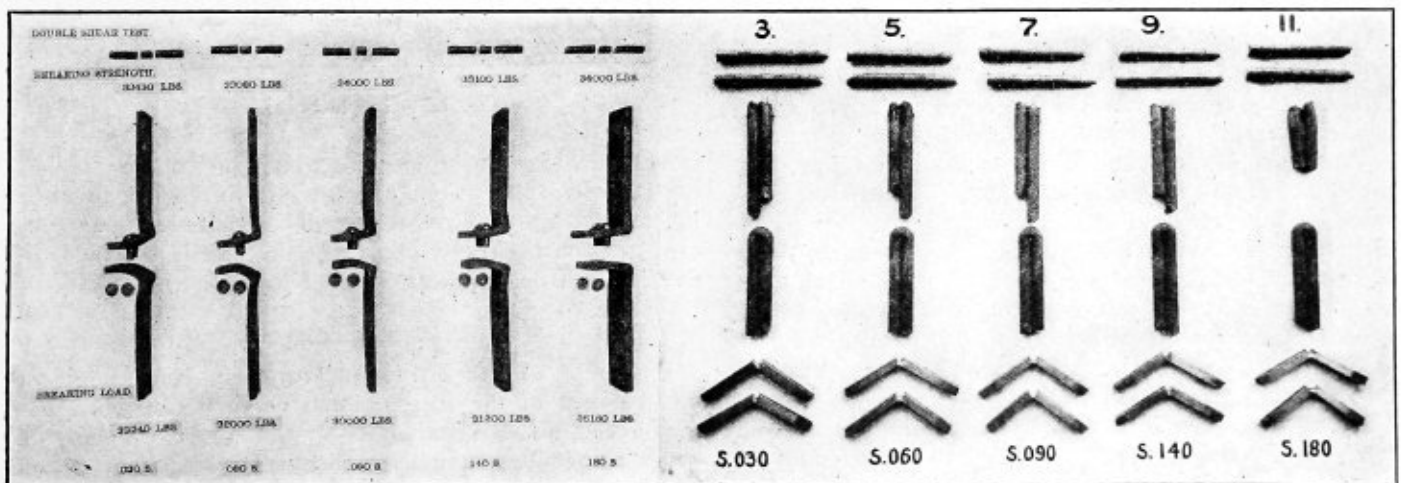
Tests of 3/4-Inch Rivets, 0.09 Carbon
